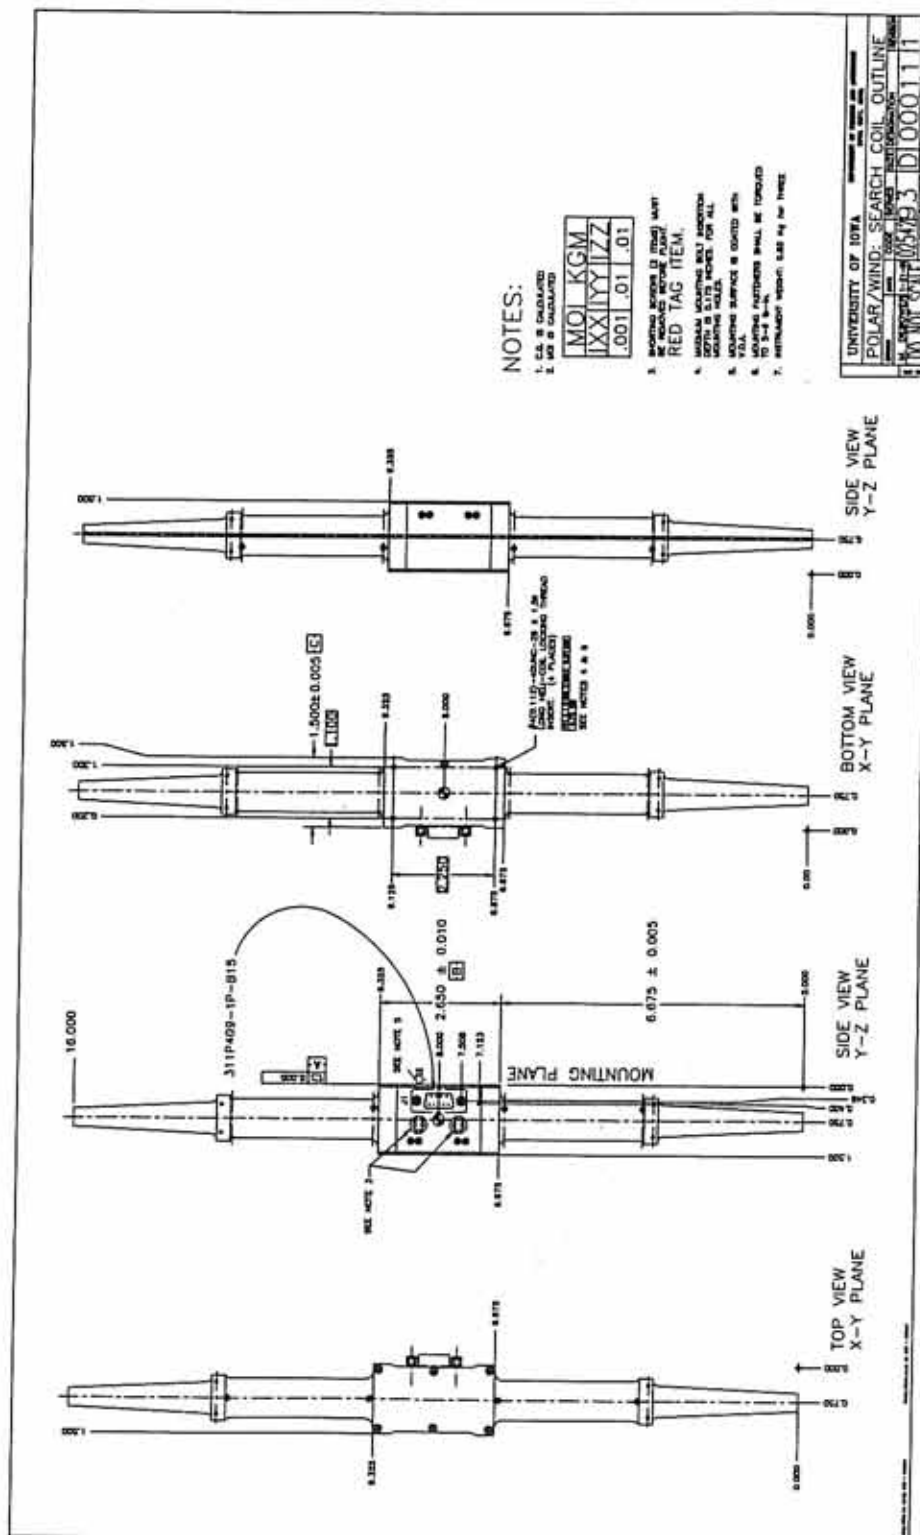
A sketch showing the location of the bobbins on the core. The dimensions are given in inches.
